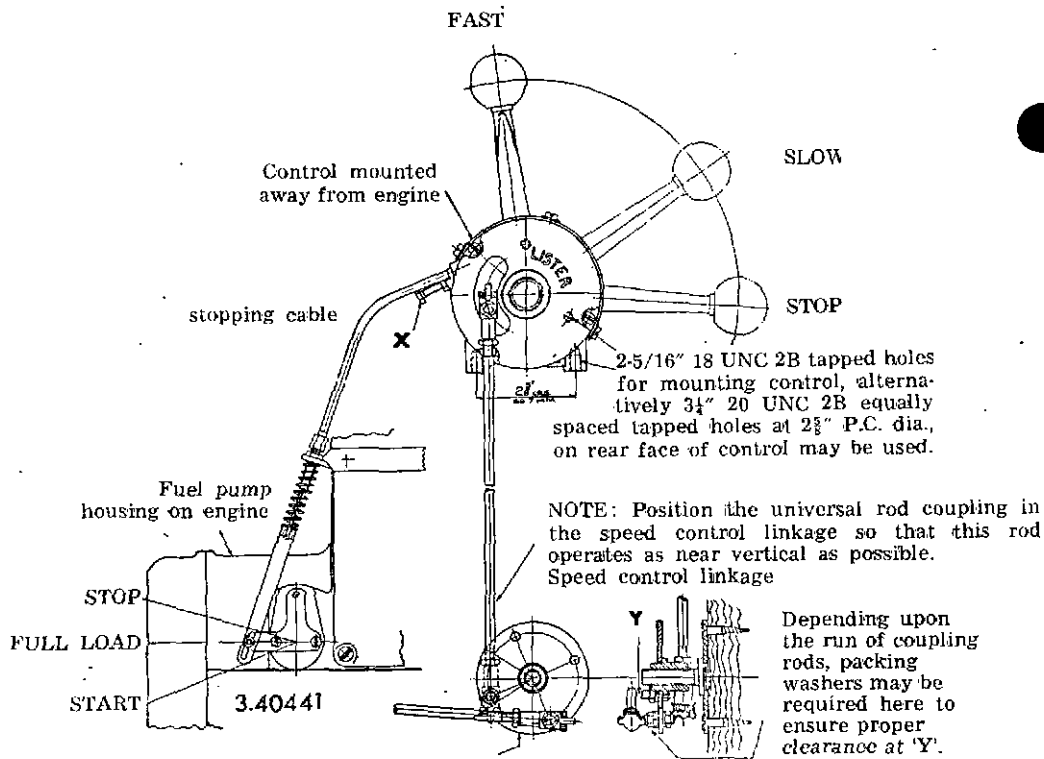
Arrangement of Single Lever Speed and Stop Control
